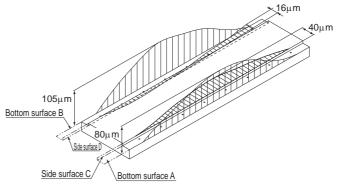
Surface Accuracy of the LM Guide Mounting Base (Milled Surface Only)
